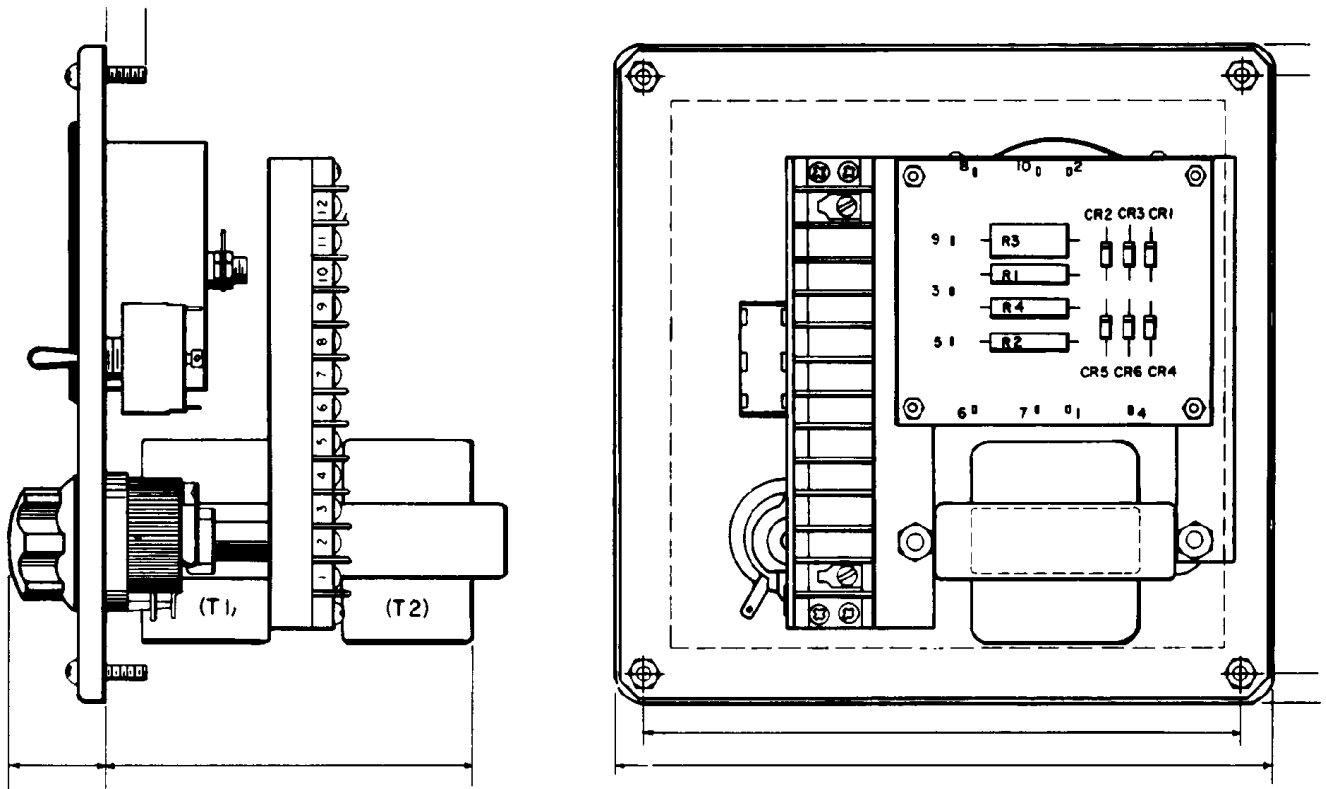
Outline Drawing of the 2301 Power Transfer Control
